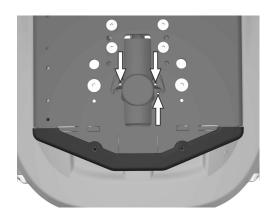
The power motor of the seat tilt mechanism is assembled with three screws.
